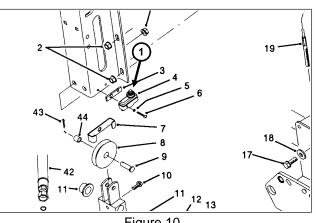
(Reelmaster 216-D) 1. Cutting unit interlock switch (Item 4)
